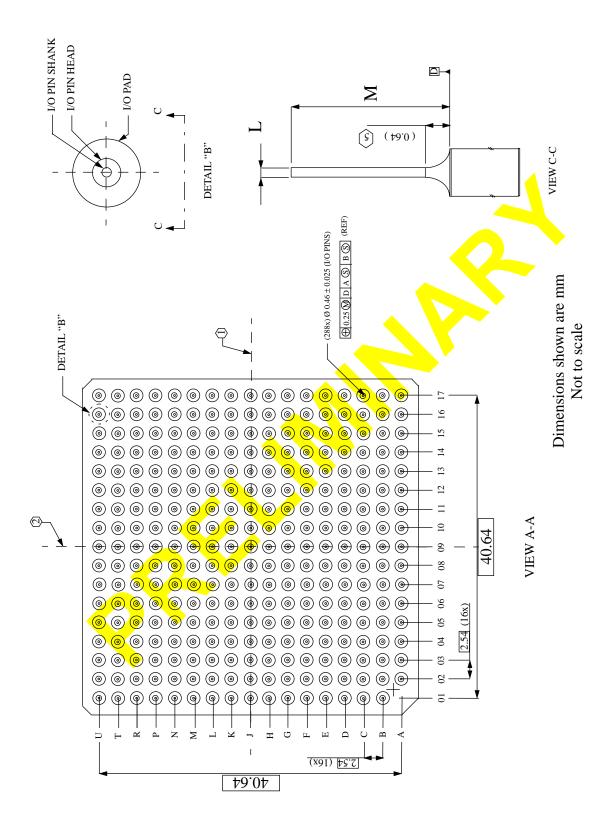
Bottom View and Pin Detail of the IBM 604 PGA package
